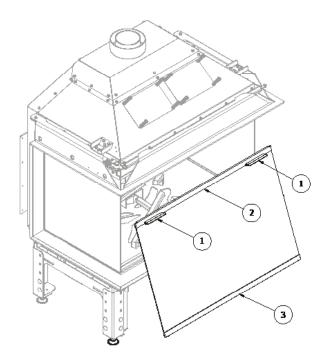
Removing the front glazing: 1 - handle; 2 - upper strip; 3 - bottom strip
